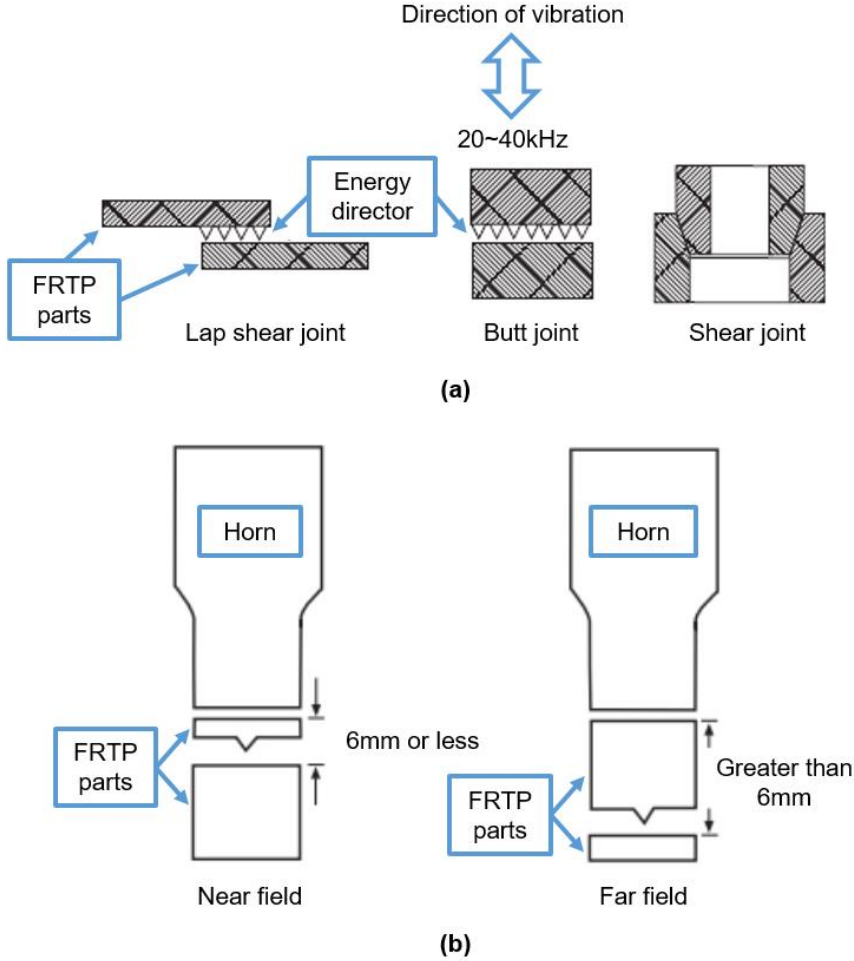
Different joining designs for ultrasonic welding (a) [108]; Ultrasonic welding: near-field and far-field welding (b) [109]
